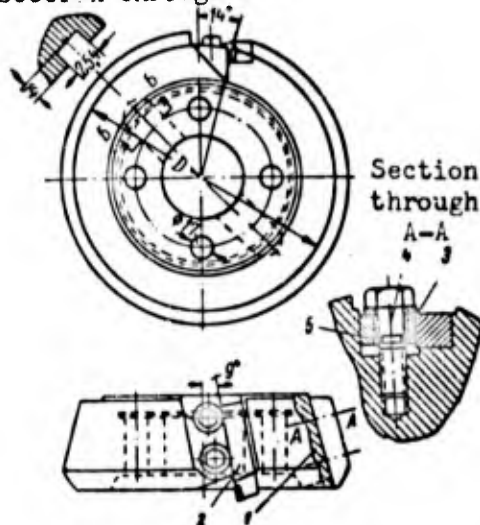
Design of Carbide-Tipped, 200 - 400 mm Diameter Inserted-Tooth End-Milling Cutter
